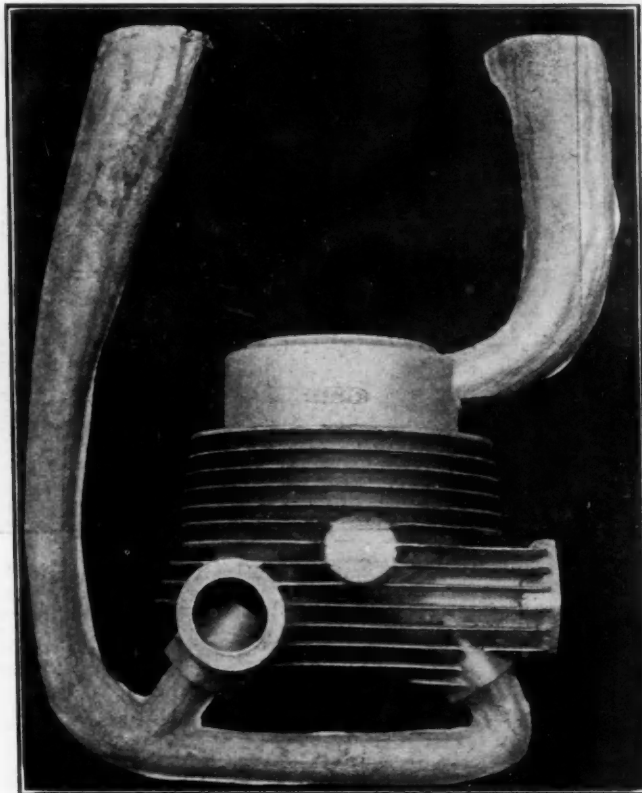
AN AIR-COOLED-ENGINE CYLINDER-HEAD CASTING. This Casting Was Poured from a Temperature of 1350 Deg. Fahr. into a Dry-Sand Mold
